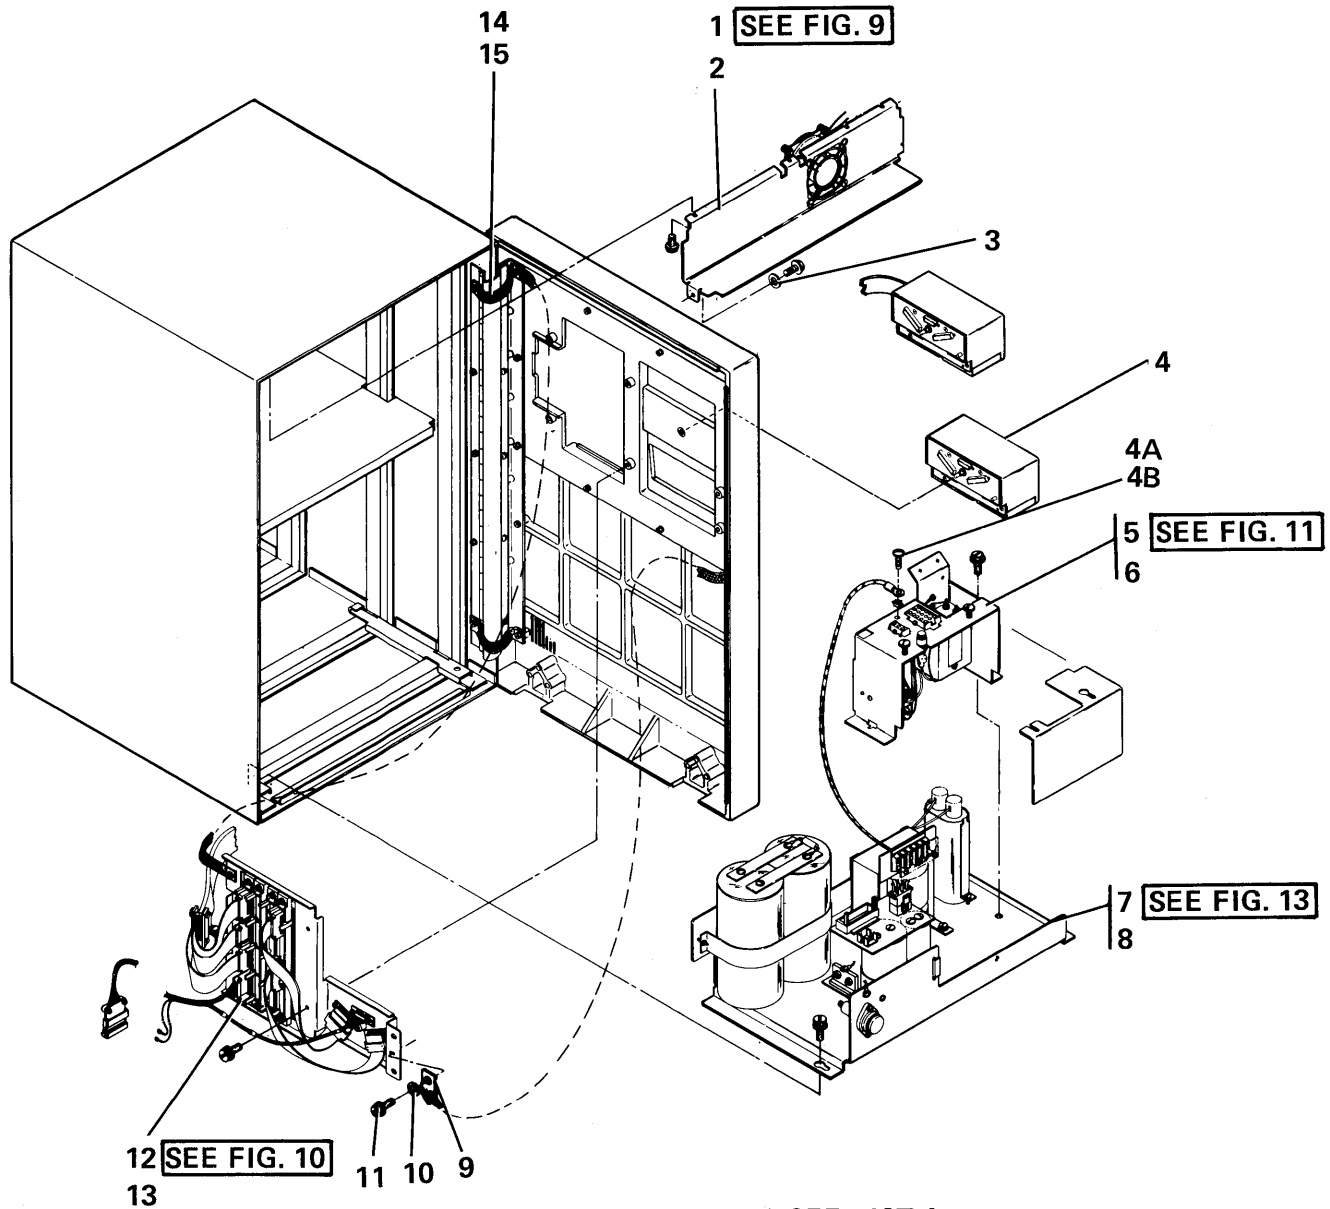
FINAL ASSEMBLY. SEE LIST 4. (BEFORE EC 835505)
